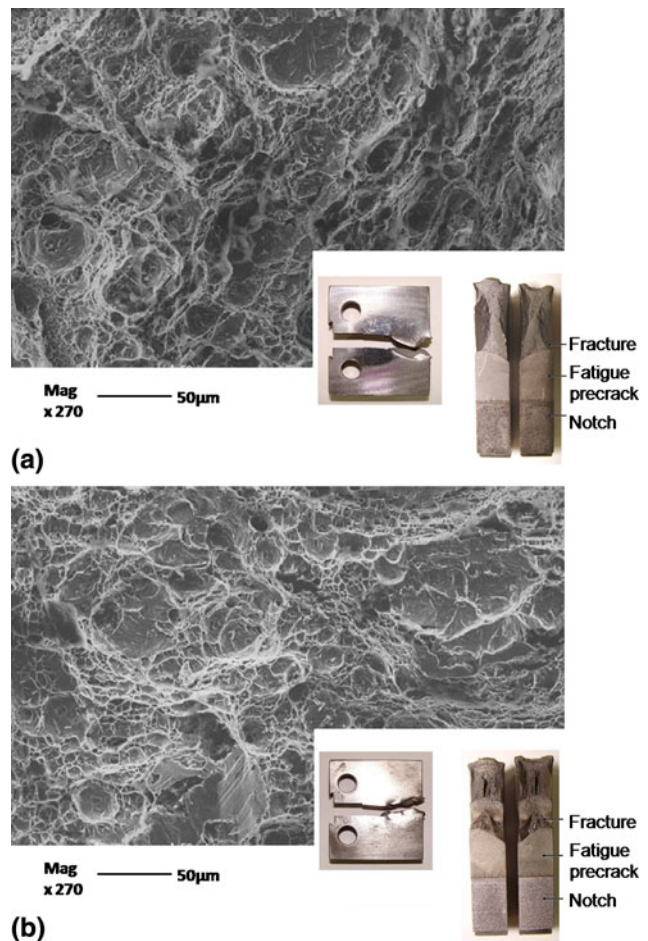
SEM image of fracture surface after fracture toughness test in air revealing a ductile fracture by dimples for samples, and macroscopic aspect of ruptured sample, in the: (a) as-received condition, Mag. 270 \times ; (b) quenched and tempered condition, Mag. 270 \times
